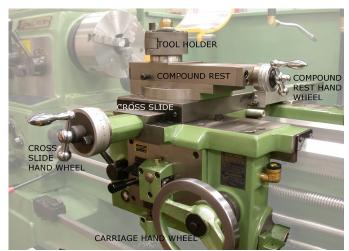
Carriage, Cross Slide, Compound Rest and Tool Holder
